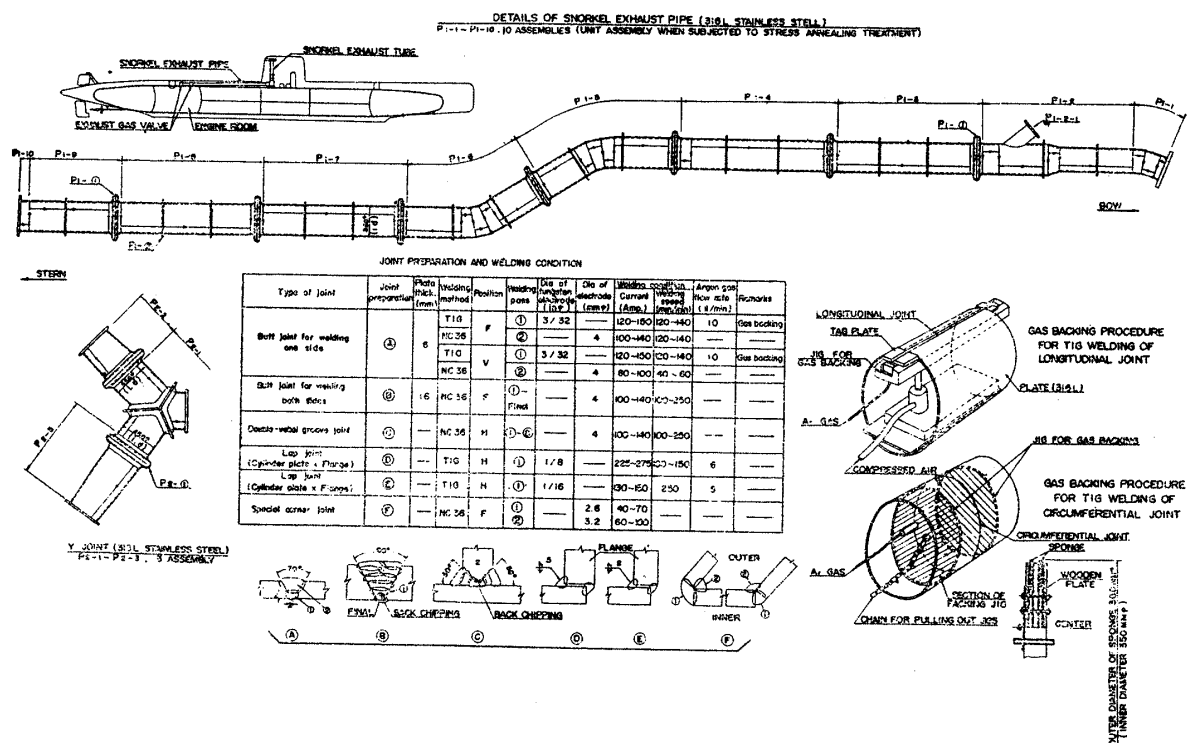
Welding procedure for snorkel exhaust pipe.
